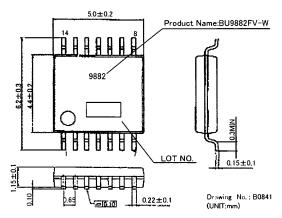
(c) PHYSICAL DIMENSION SSOP14(BU9882FV-W)
